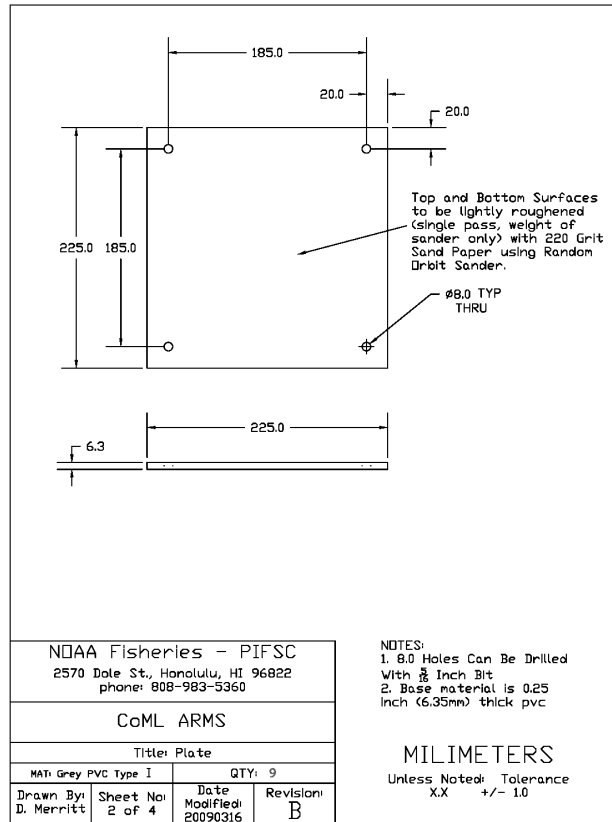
Technical drawing for manufacture of PVC baseplates.
